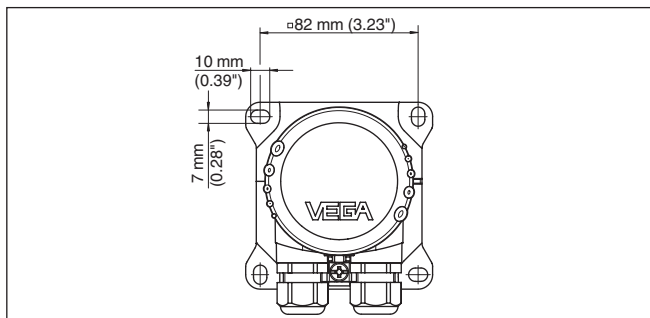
Drilling dimensions for the VEGABOX 03 for wall mounting
